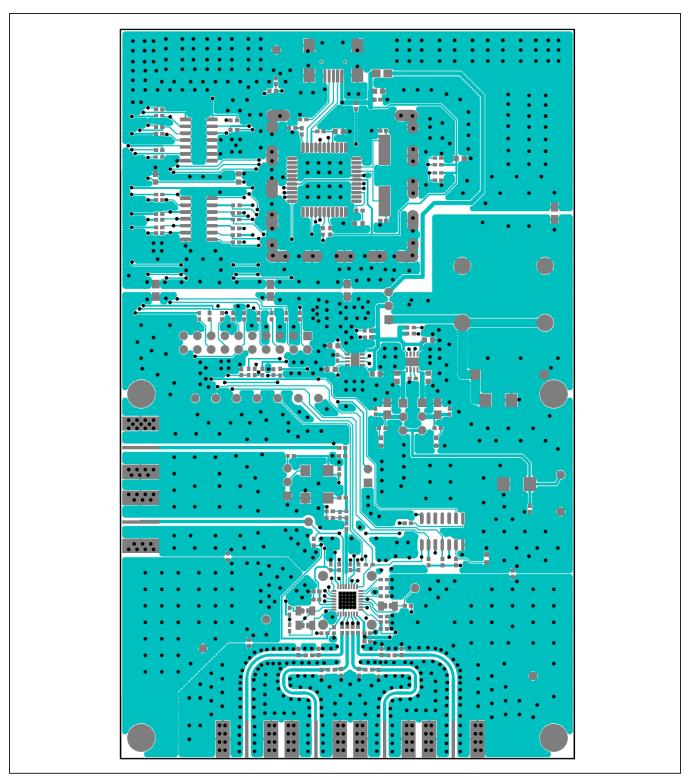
MAX2870/MAX2871 EV Kit PCB Layout—Top Layer
